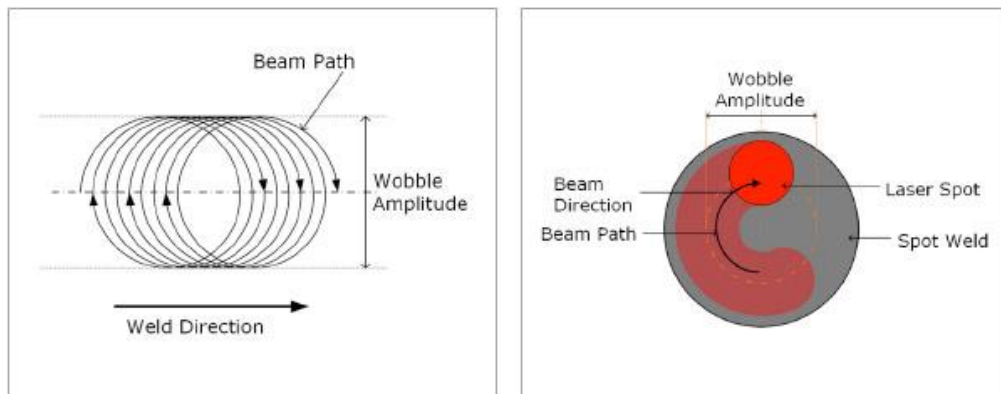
Schematic of the wobble welding technique [28].
